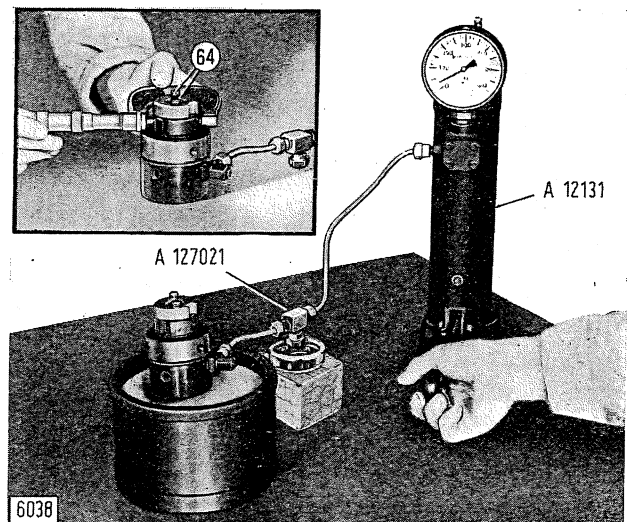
Checking the maximum outward roller stroke under a pressure of 30 atm (427 p.s.i.).
